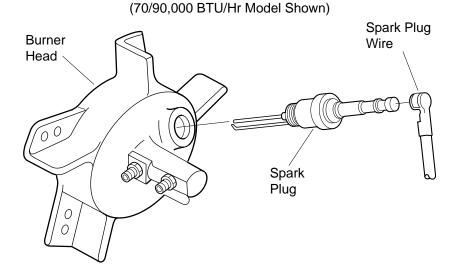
Spark Plug Removal, 70/90/150,000 BTU/Hr Models
